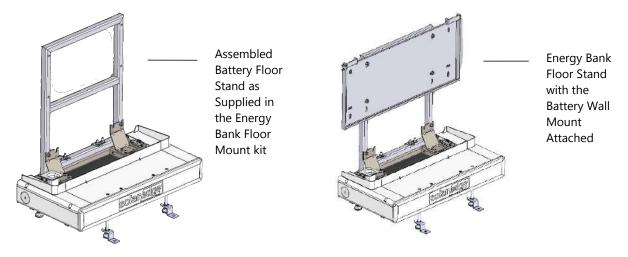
Assembled Floor Stand and Floor Stand with Battery Wall Mount
